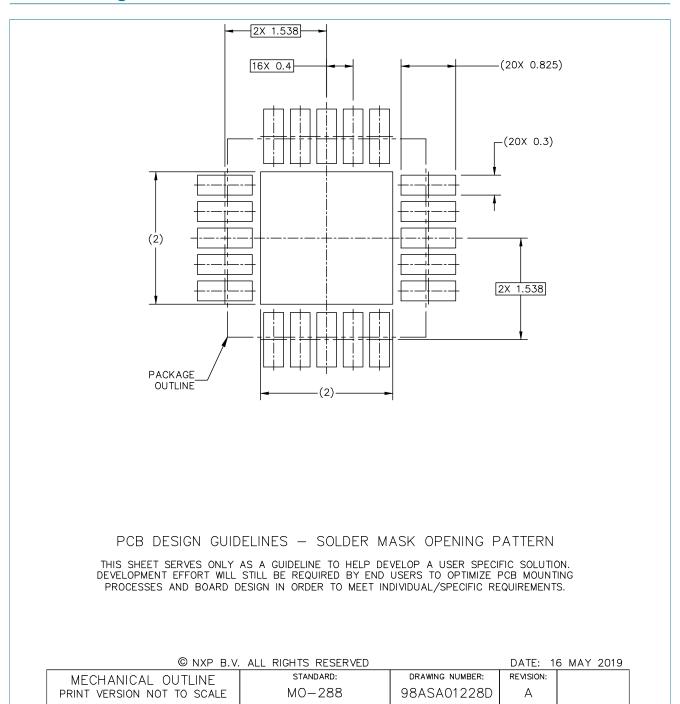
Reflow soldering footprint part1 for HX2QFN20 (SOT1969-1)
